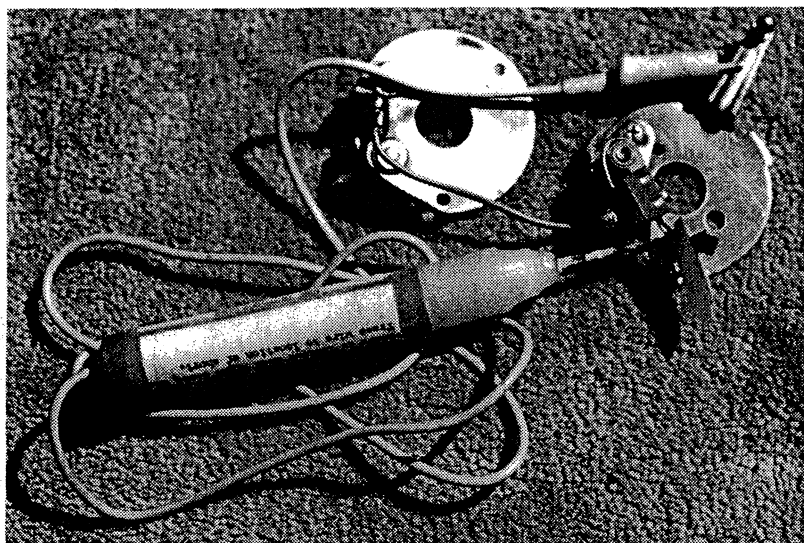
Upper and lower plate connected by new pig tail wire. Test probe is set to check for ground short. Note insulating paper between point gap assembly.
